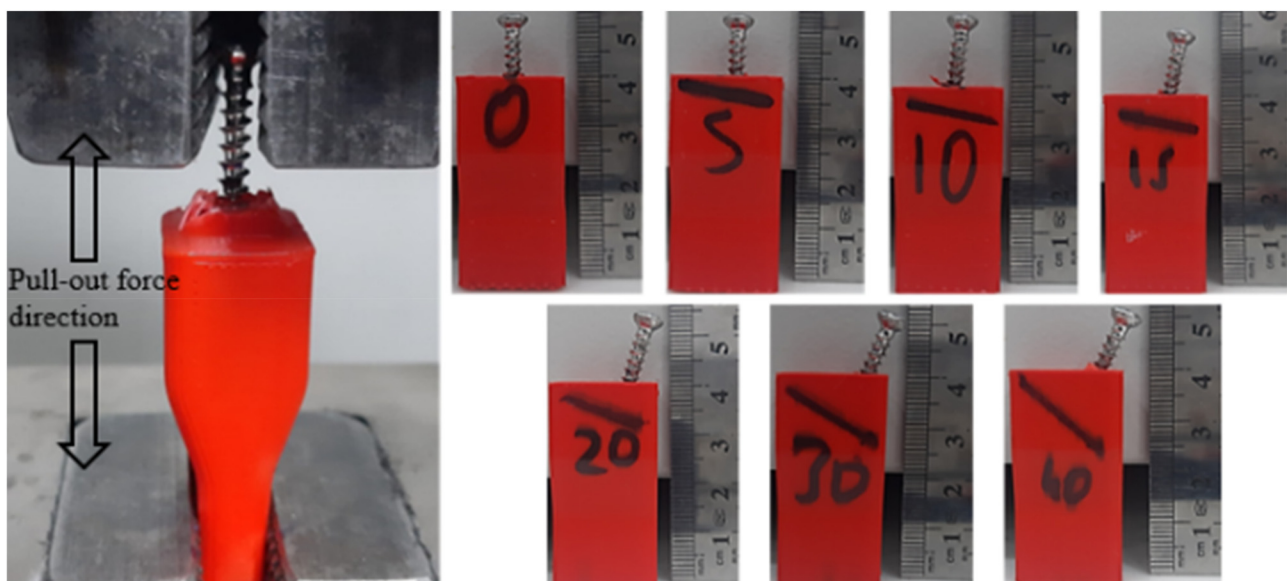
Test specimen damaged as a result of pull-out test and test specimens with screws placed at different angles.
